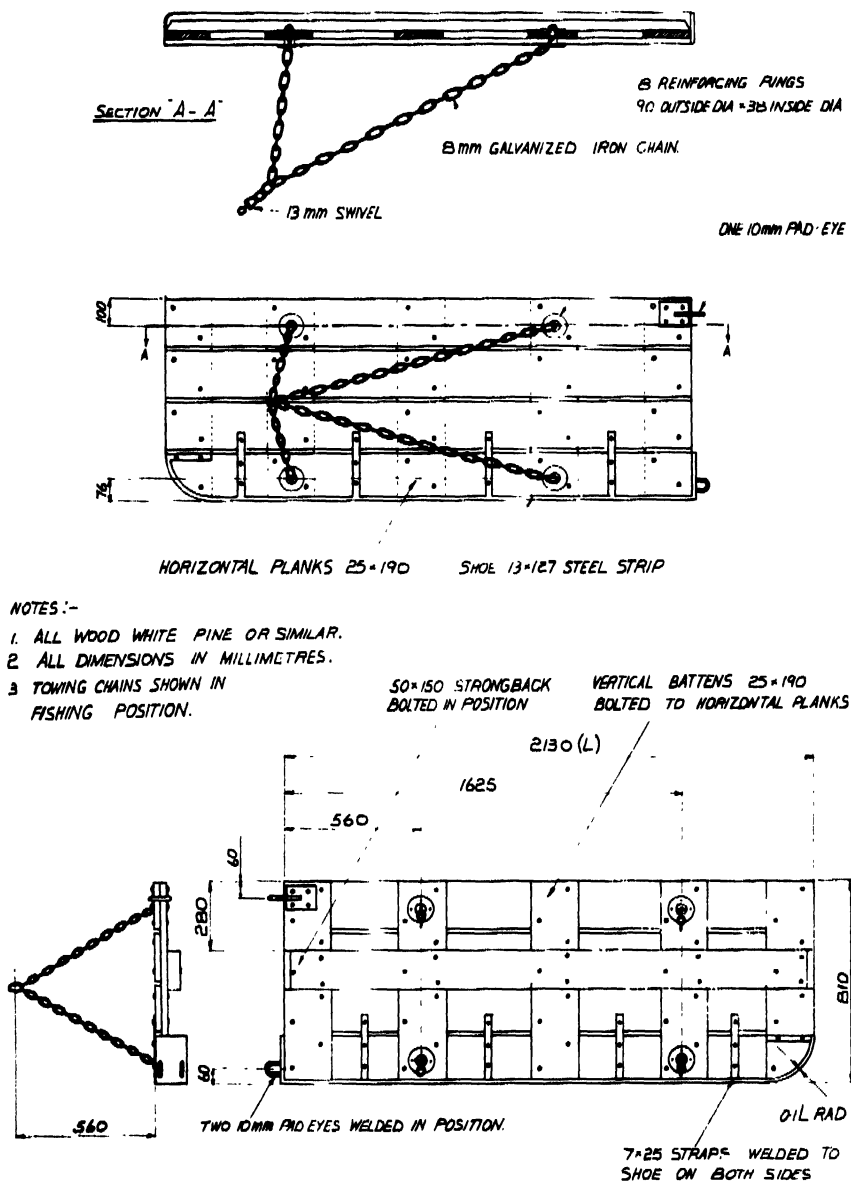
Construction drawing of a rectangular flat otter board, wide-keeled type for shrimp trawling, of 1.7 m<sup>2</sup>.
